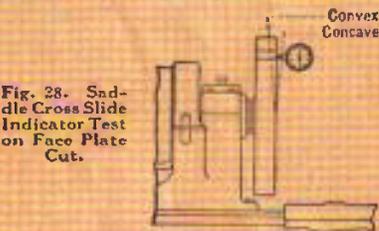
Saddle Cross Slide Indicator Test on Face Plate Cut.
